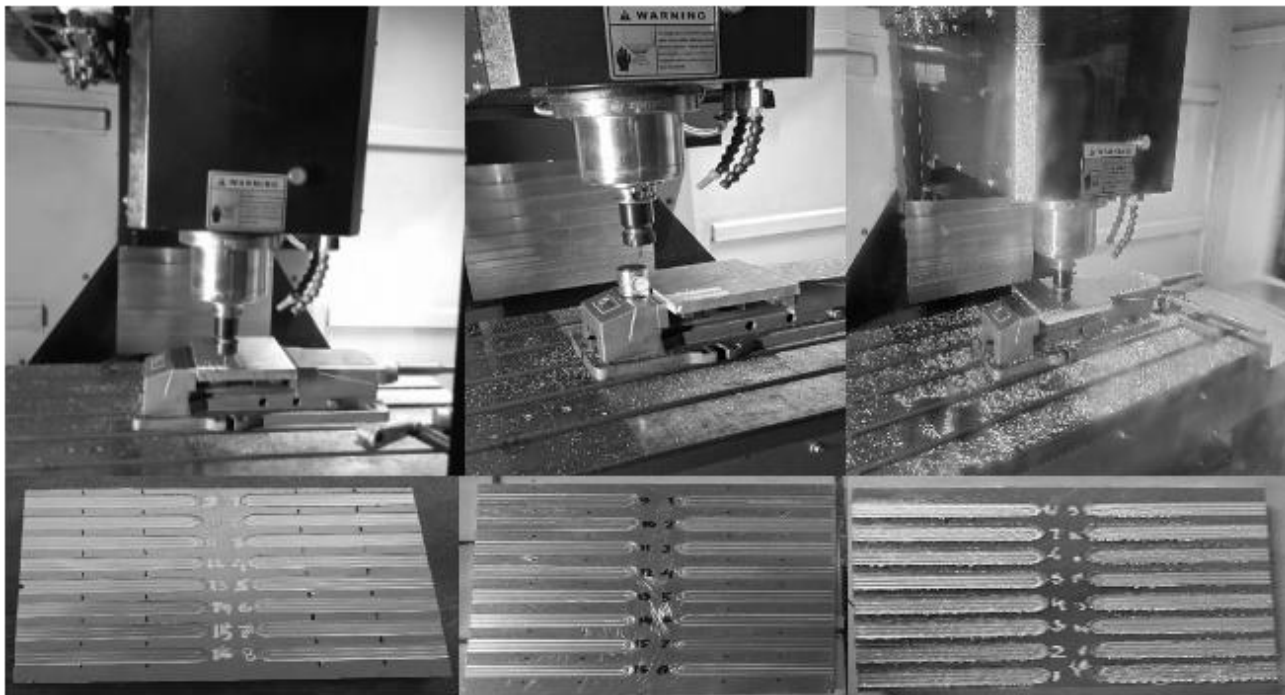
Machining process: Al7075 (a), Al6061 (b), Al5052 (c)
